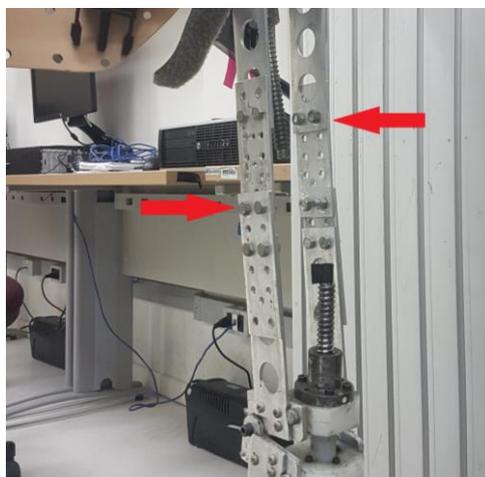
First prototype height adjustment system, the adjustment is made by changing position of the indicated screws
